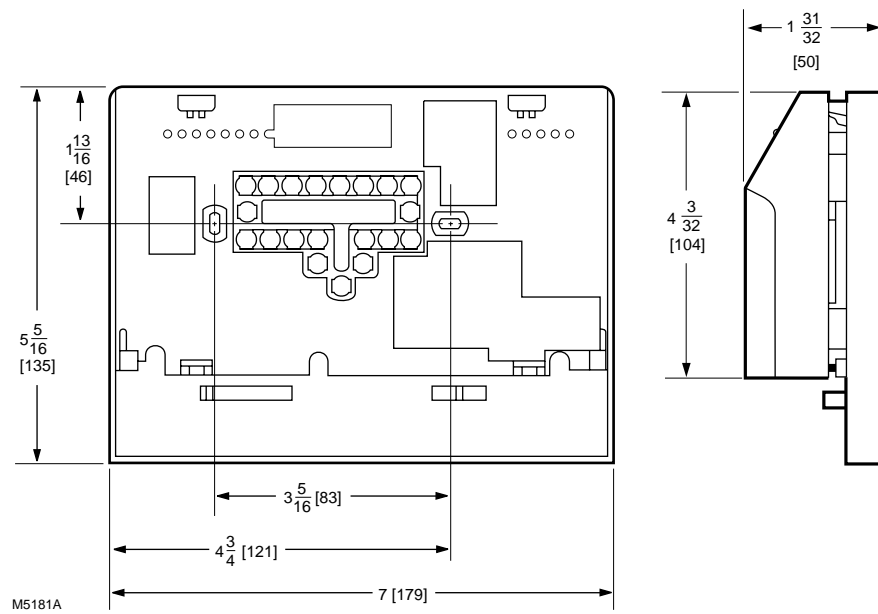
202905AA Remote Sensor dimensions in in. [mm].
